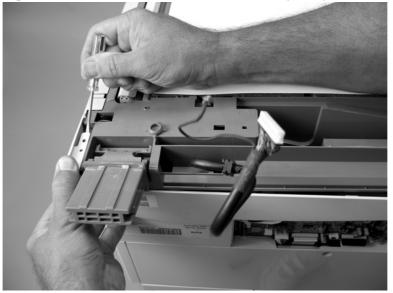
Remove the ADF rear end cover (4 of 5)
